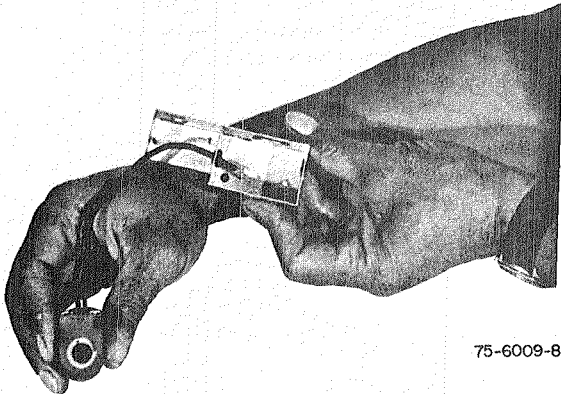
Align the Hole in the Coil with the Holes in the Yoke.
